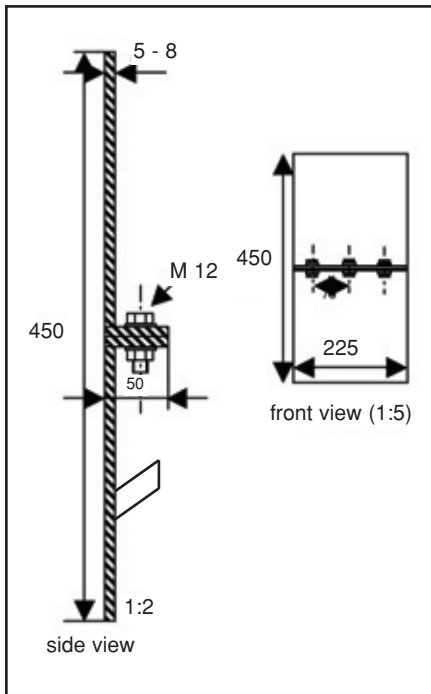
Specimen design for splash zone (SZ); dimensions in mm
